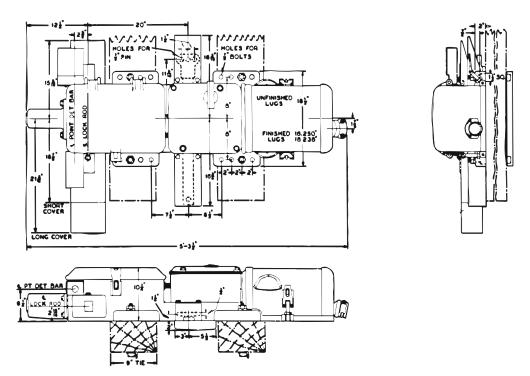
Typical M-3 Switch Machine Mounting Plan (Right-Hand Assembly with Adjacent Point Closed)
